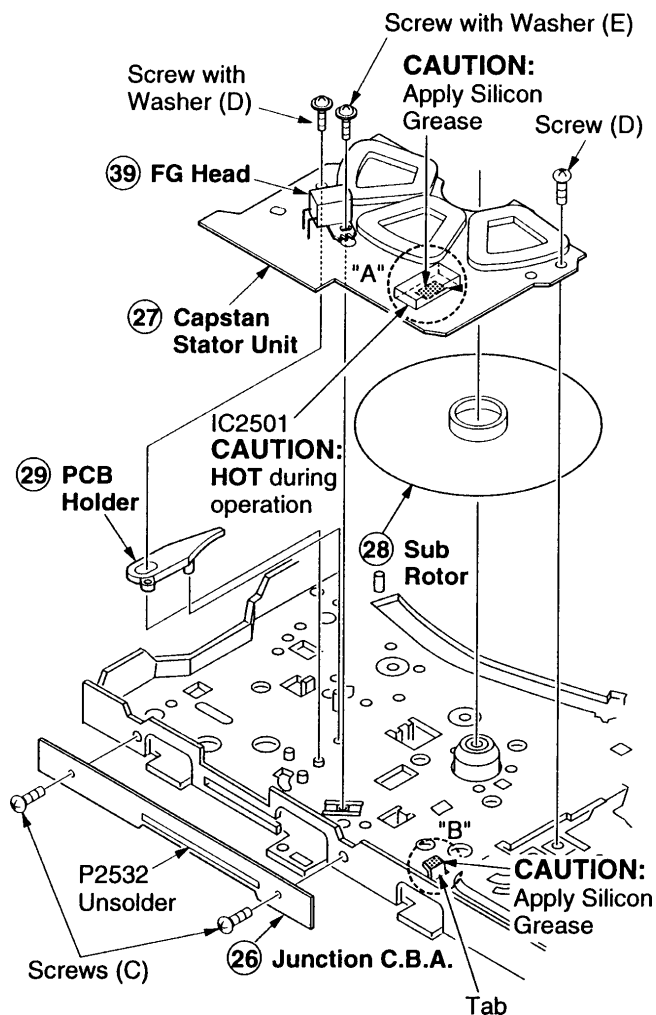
Junction Circuit Board/Capstan Stator Unit/Sub Rotor/PCB Holder Removal
